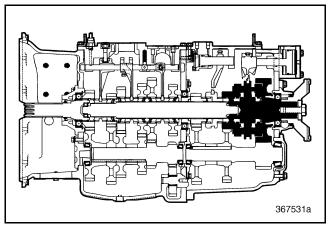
Rear Mainshaft and Synchronizer Component Locator (T313L/T318L Shown)
